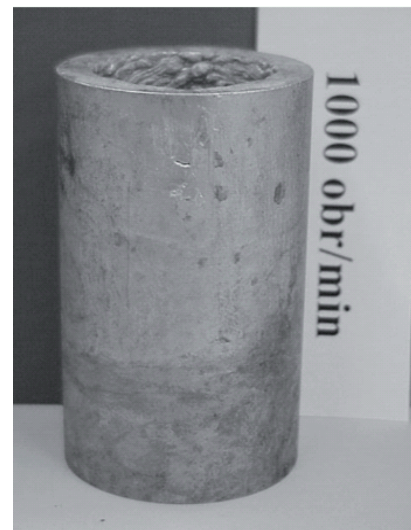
View of an aluminium composite sleeve obtaining by the centrifugal casting method
